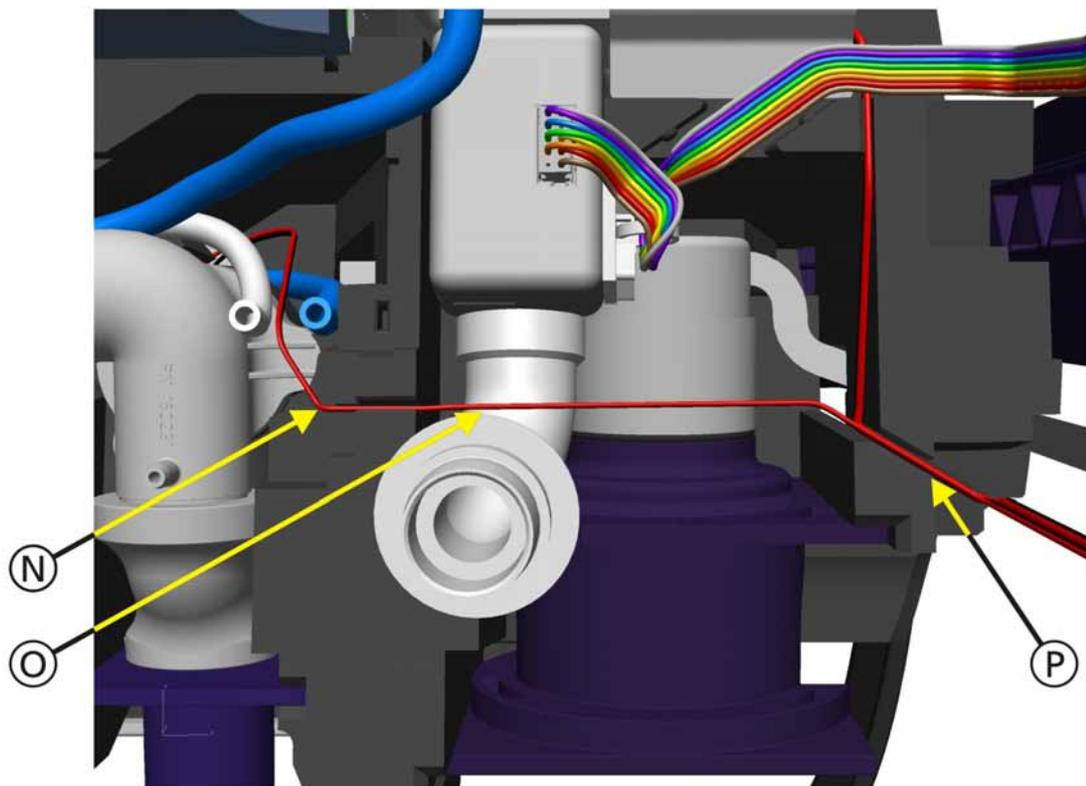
Inspiratory Valve, Qvent Flow Sensor and Ambient Valve Assembly, Step 4
